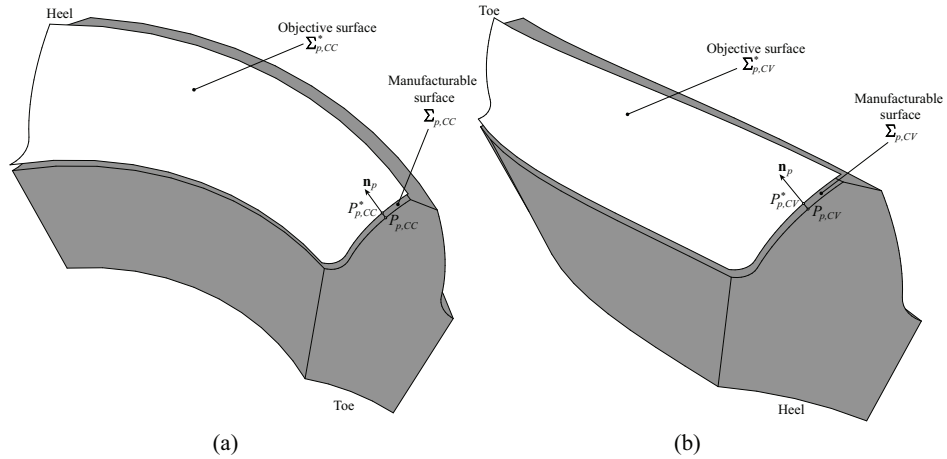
Schematic representation of manufacturable surfaces and objective surfaces for the fixed-settings face-milled spiral bevel pinion: (a) tooth concave active surface; (b) tooth convex active surface.
